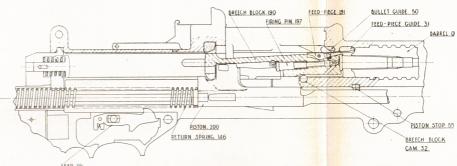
Breech Block and Piston partly recoiled. Breech Block unlocked
